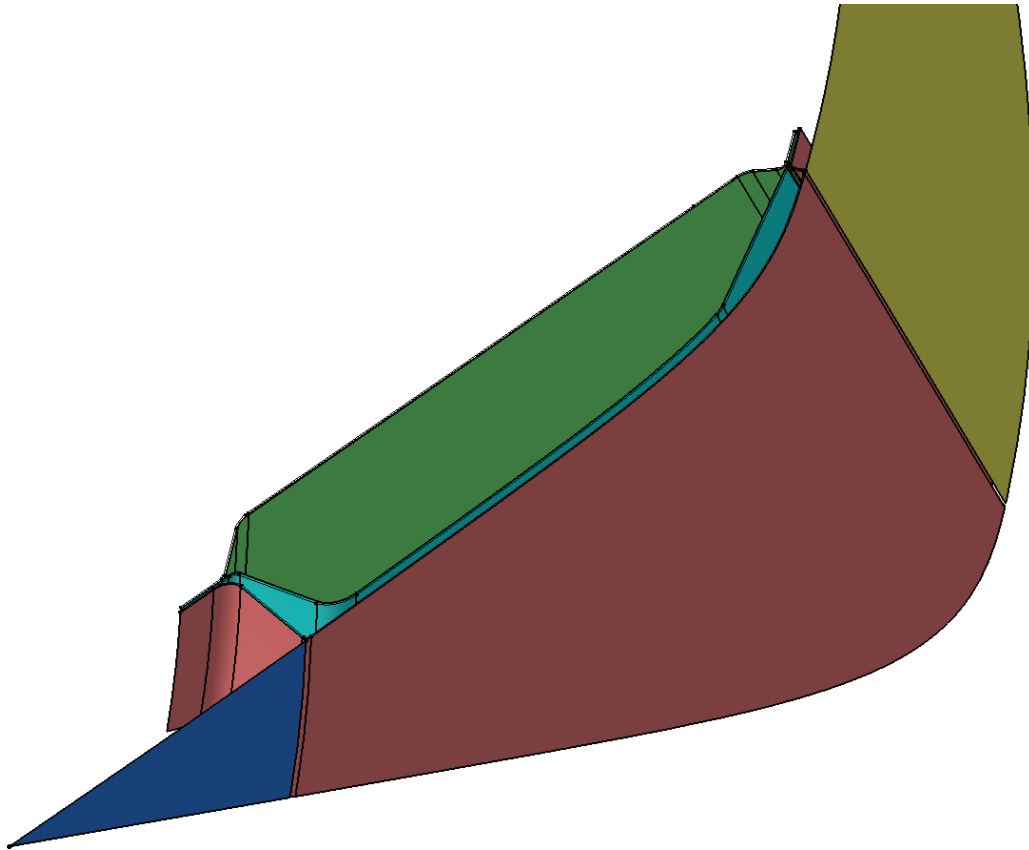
Control section with view cut through the completed C-pillar design, cut by the plane of the concept section
